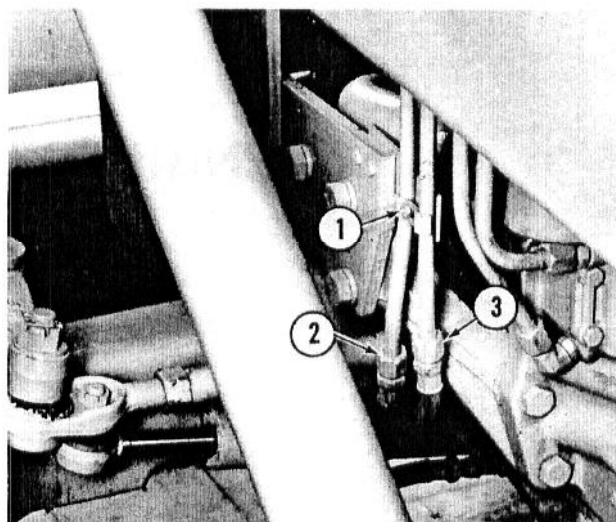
STEERING LINES TO STEERING CYLINDERS
